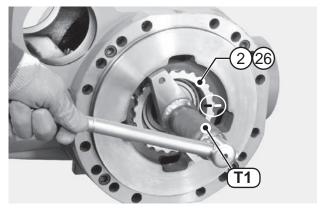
Only if removing or adjusting, use special tool T1 (See drawing T1 p. 79) to mark the position of the ring nuts (2) and (26).
